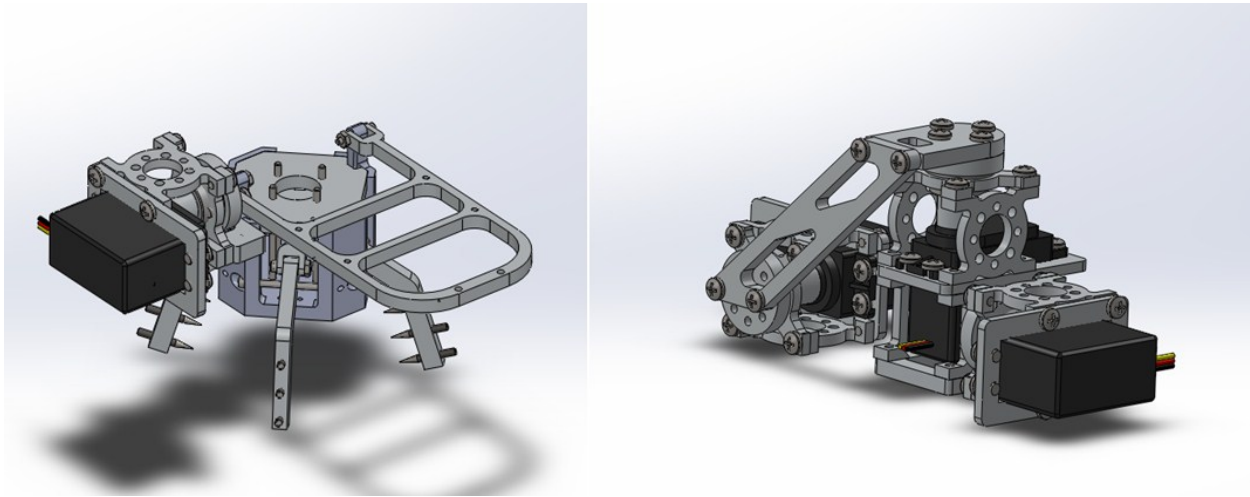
Gripper Frame Assembly Solidworks Rendering Left/ Spherical Wrist Assembly Solidworks Rendering Right
